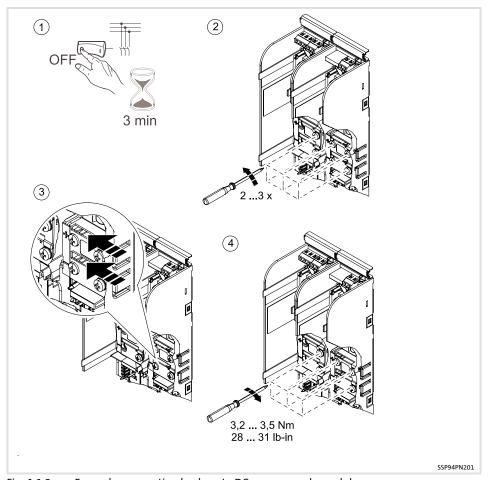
Example: connecting busbars to DC power supply module
